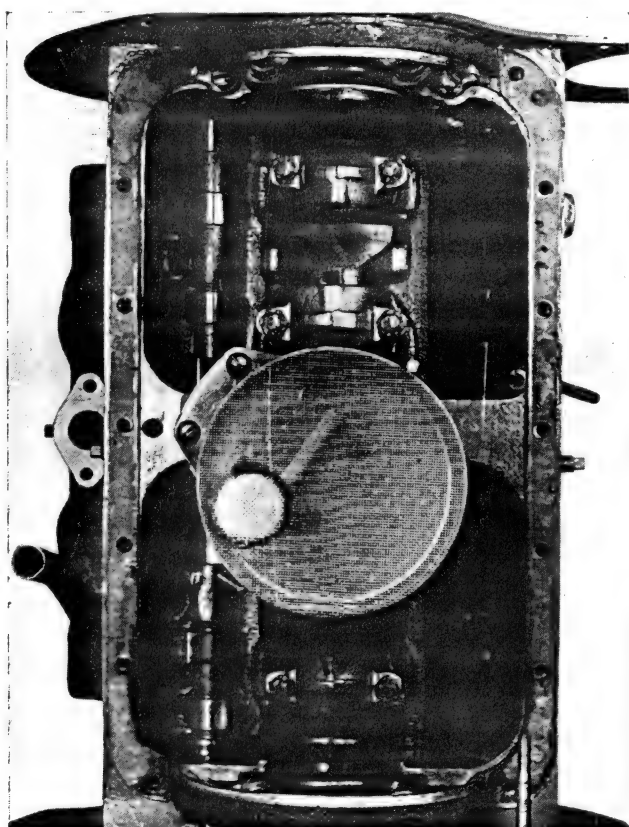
Bottom View of Engine With Oil Pan Removal
